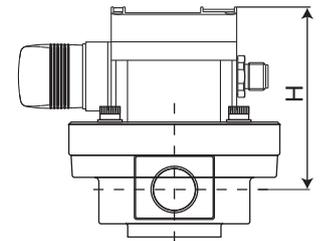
Dimension H [mm] of the 8072 depending on the S070 fitting diameter
